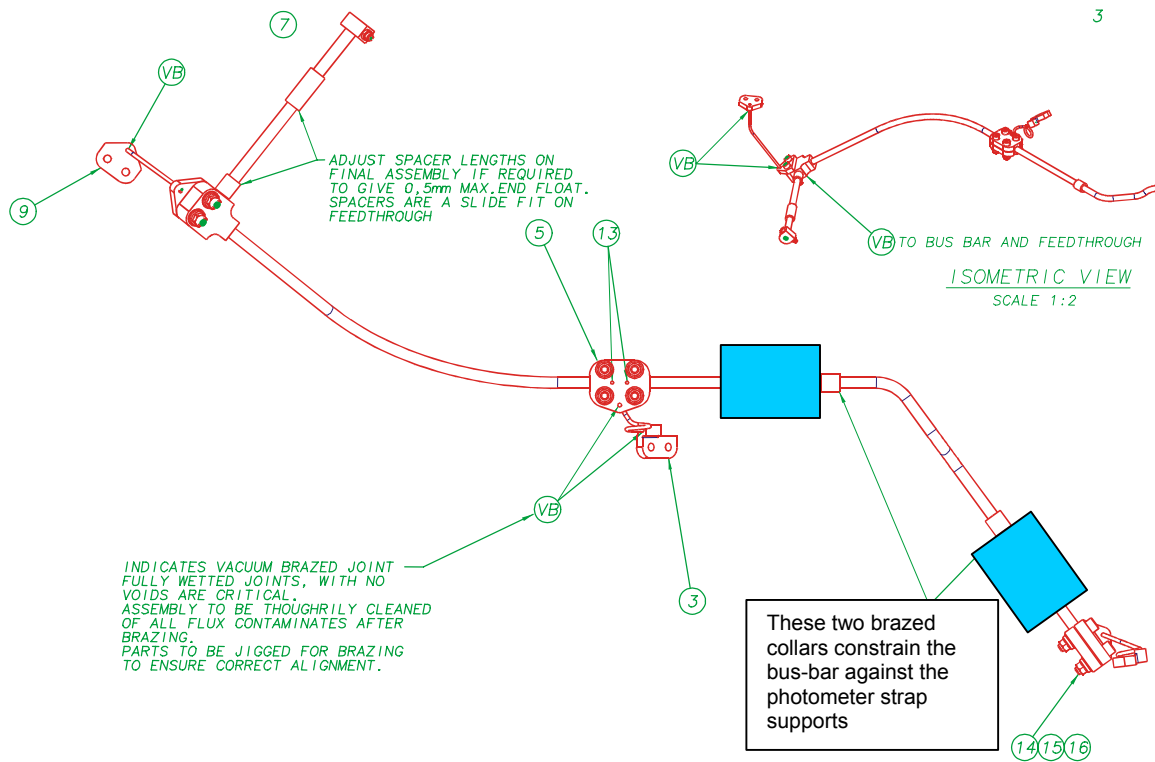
Detail of photometer bus-bar assembly showing method of axial constraint.
